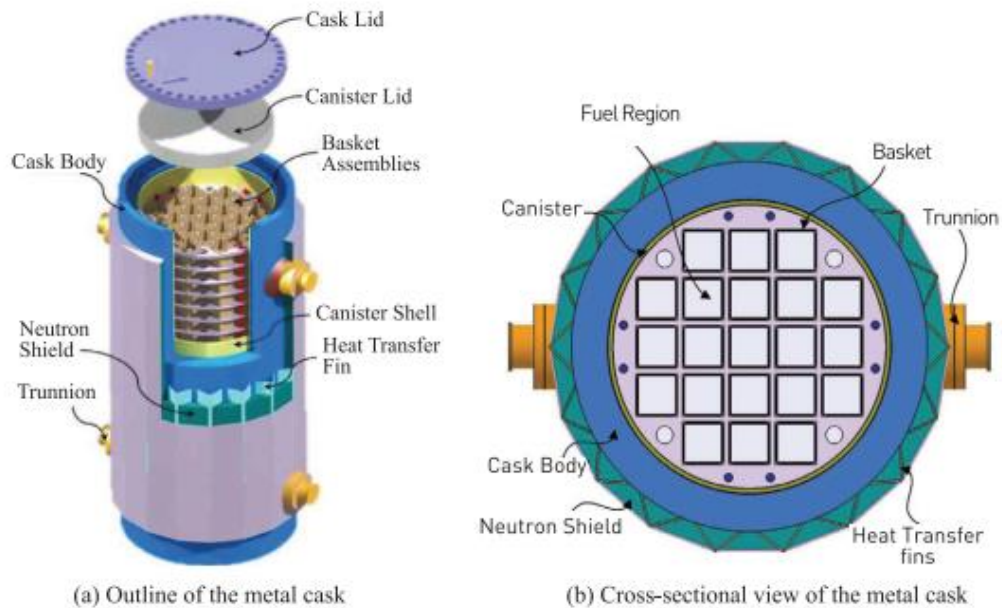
Outline and cross-sectional view of the Korean dual-purpose cask
